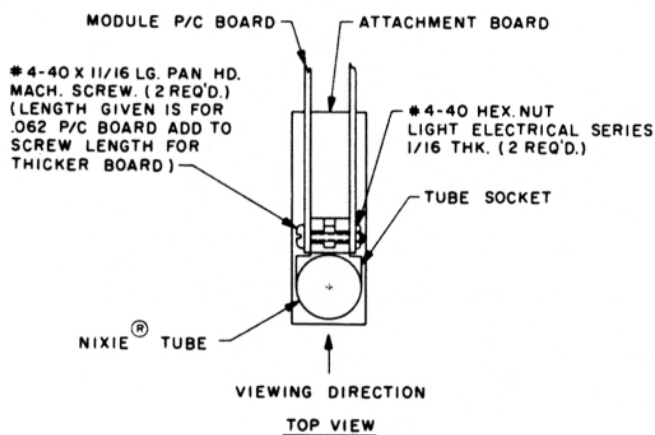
DRIVER MODULE BOARD DUAL RIGHT AND
